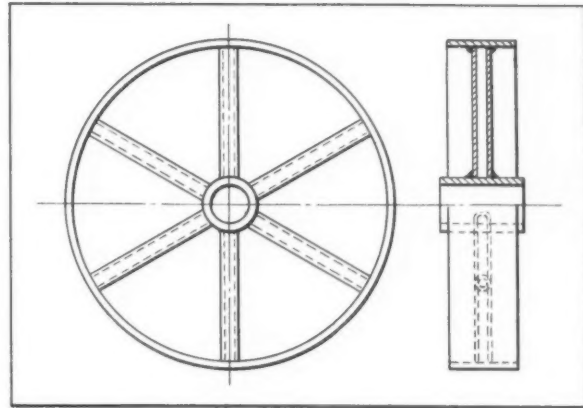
Truck Wheel Made Entirely of Scrap Pipe by Arc Welding
